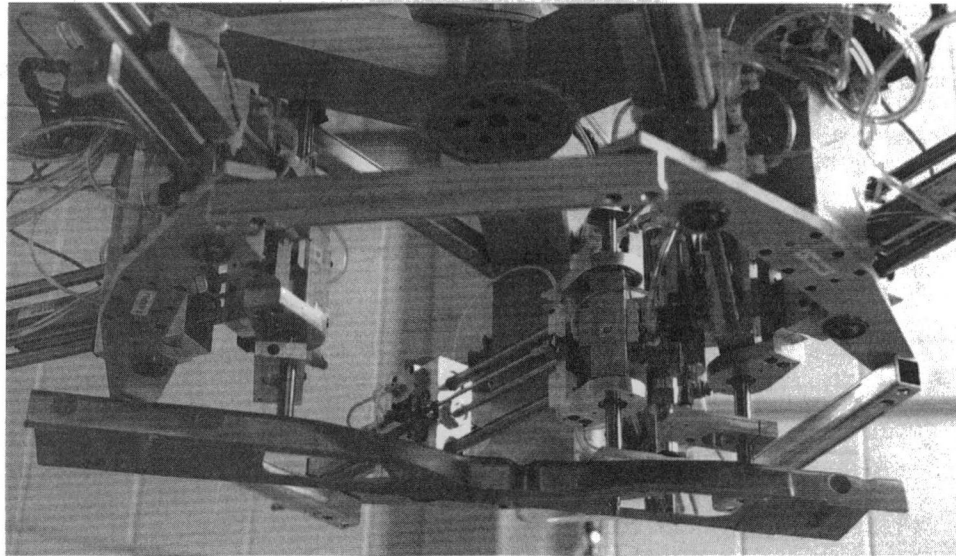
Photograph of the implemented design holding a sheet metal part (patent pending [5])
